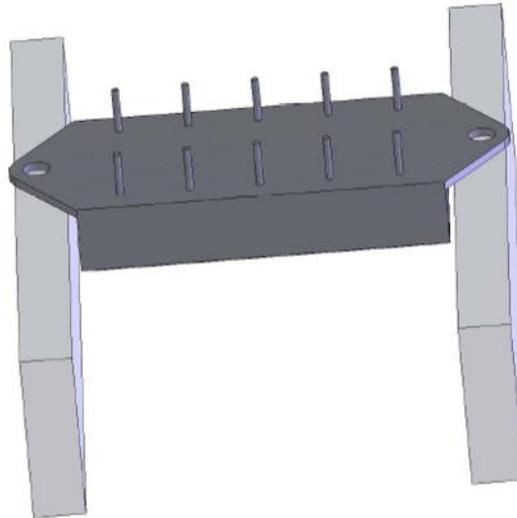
“Deadbug” Style Mounting for Downloaded Flanged Units.
